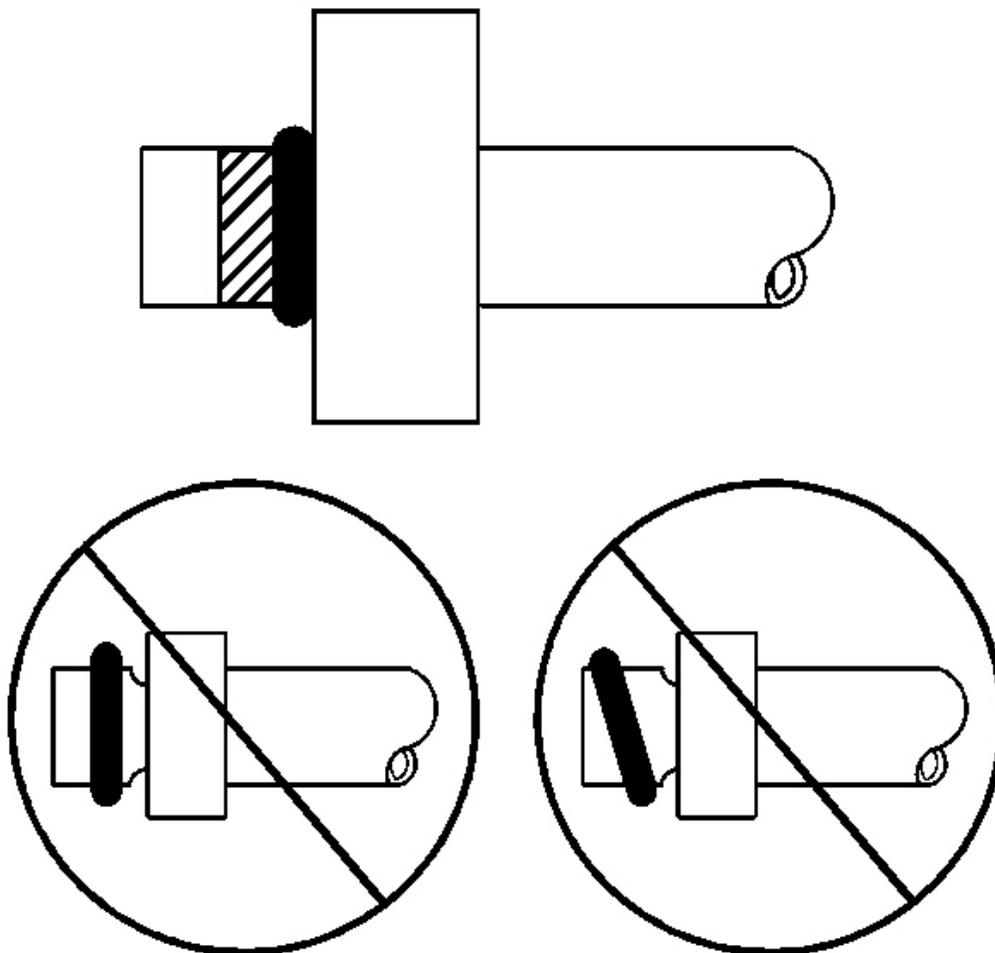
Identifying Proper Seating Of A/C Refrigerant O-Ring
